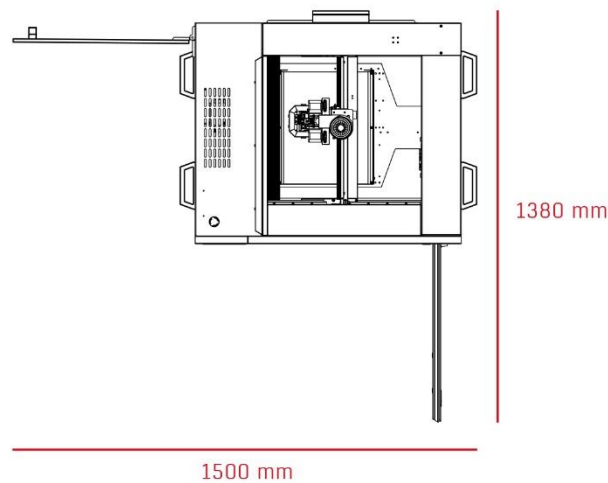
Maximum dimensions of 3DGence INDUSTRY F340 printer – overview
